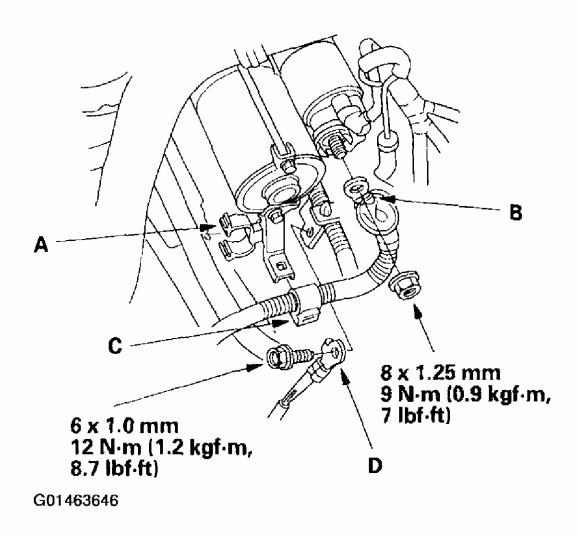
Installing The ATF Cooler Hose In The Clamp, The Starter Motor Cable, Harness Clamp & Ground Cable
